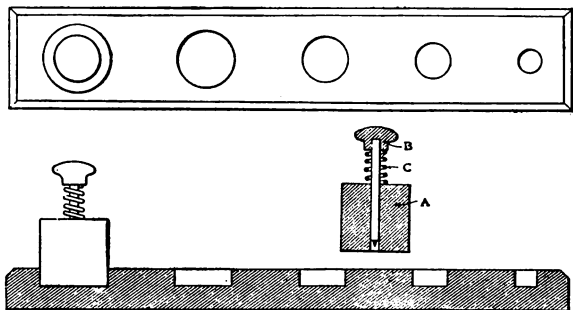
Tool for Finding Centers of Fillets and Corners.
